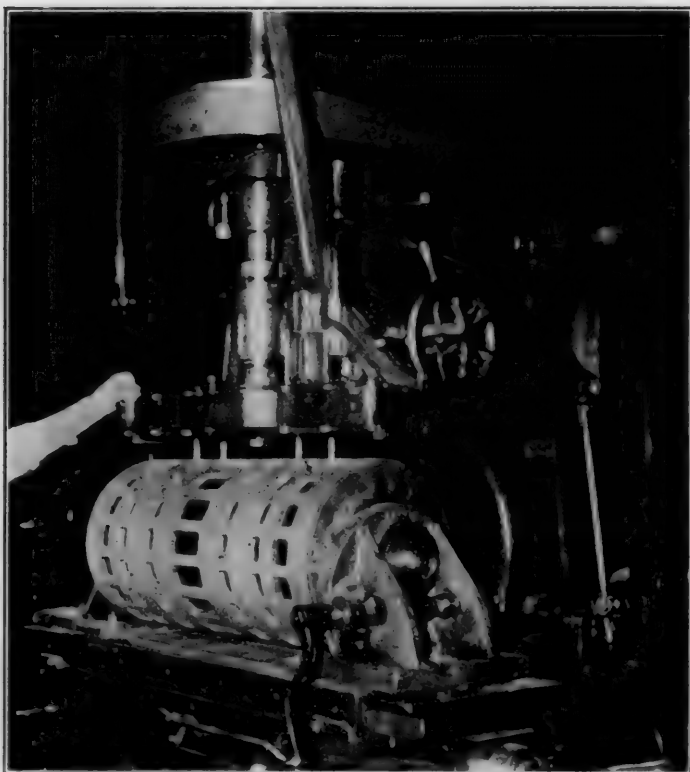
IMPROVED METHOD OF MILLING PISTON VALVE BUSHINGS.
